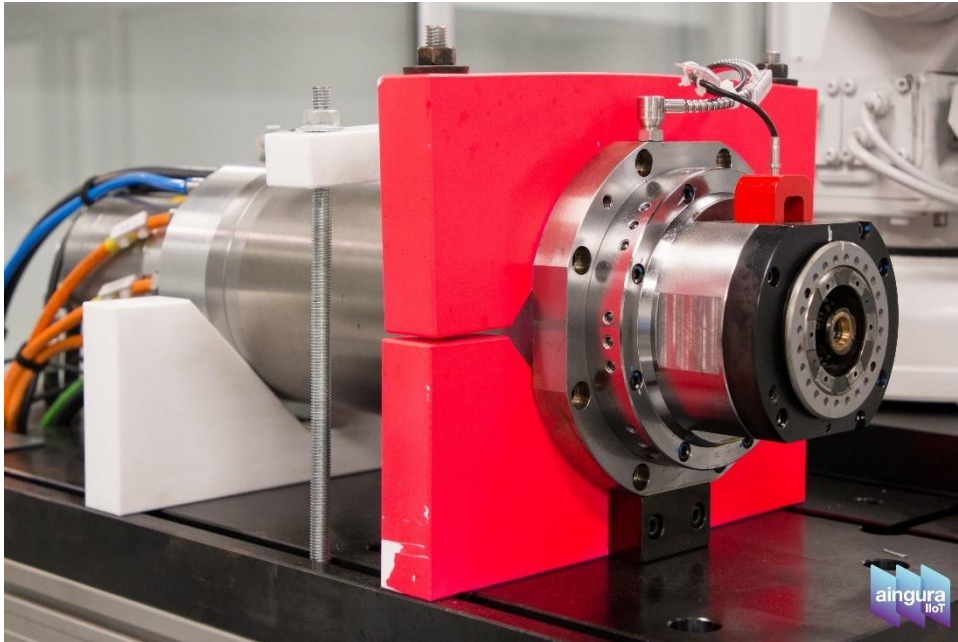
Crankshaft manufacturing spindle head (lab environment)
